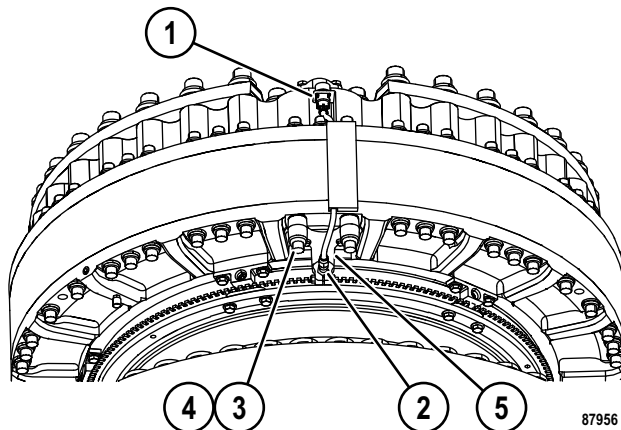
WHEEL SPEED SENSOR REMOVAL & INSTALLATION
